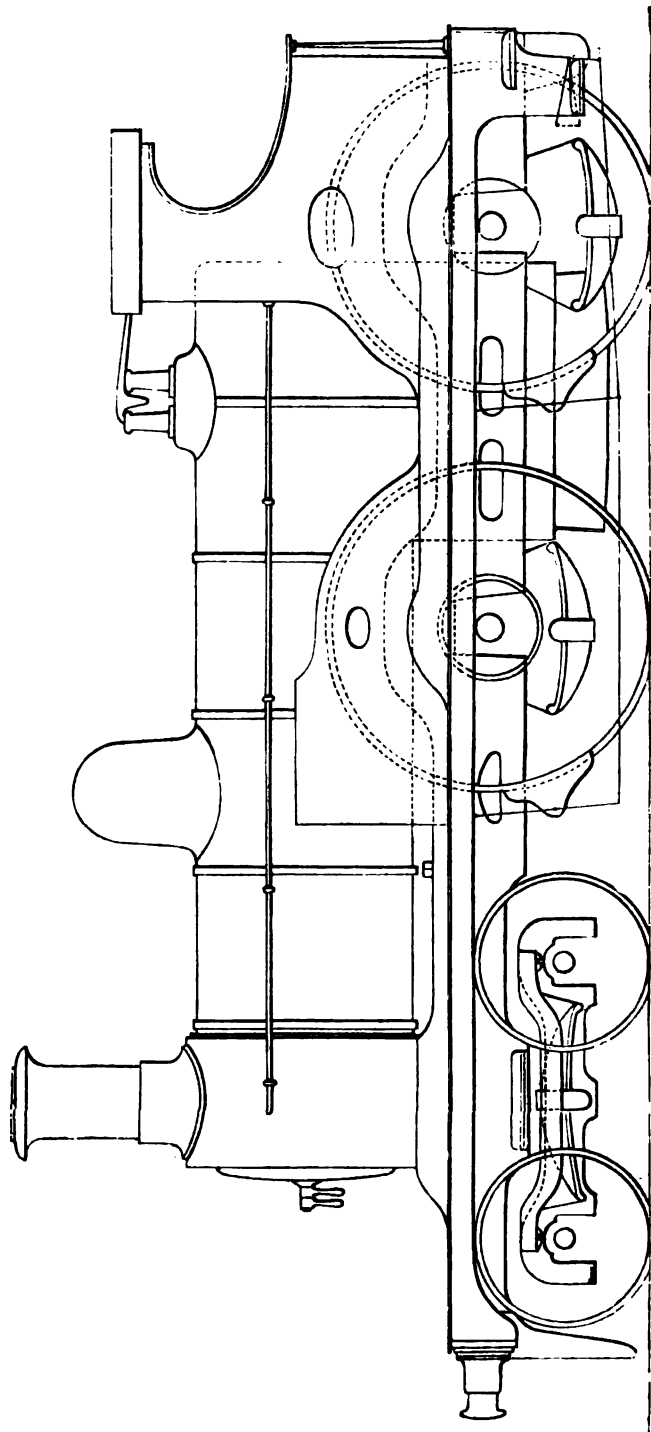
Inside cylinder express passenger bogey engine. No. 159, December 1877.
